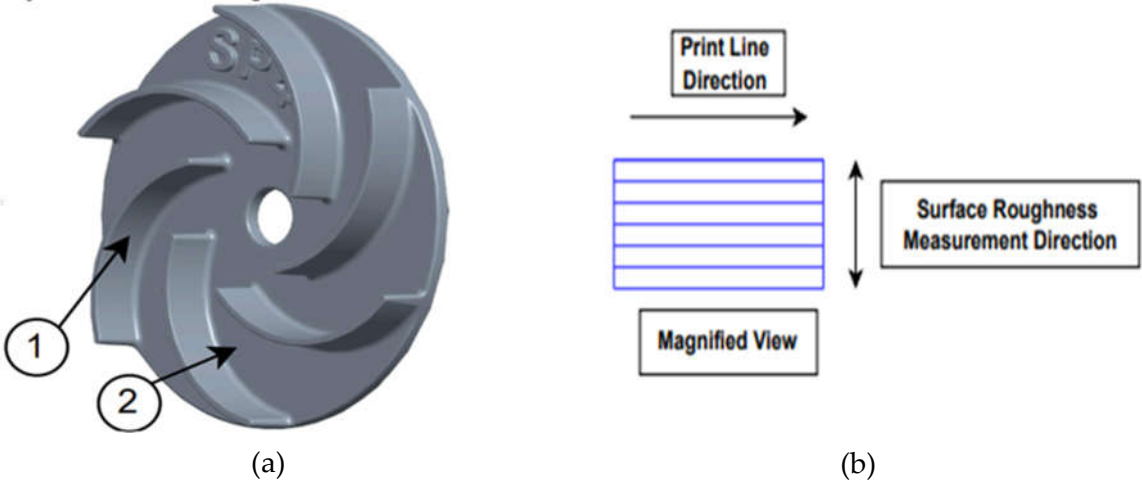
(a) Surface roughness measurement locations (b) Measurement direction.
